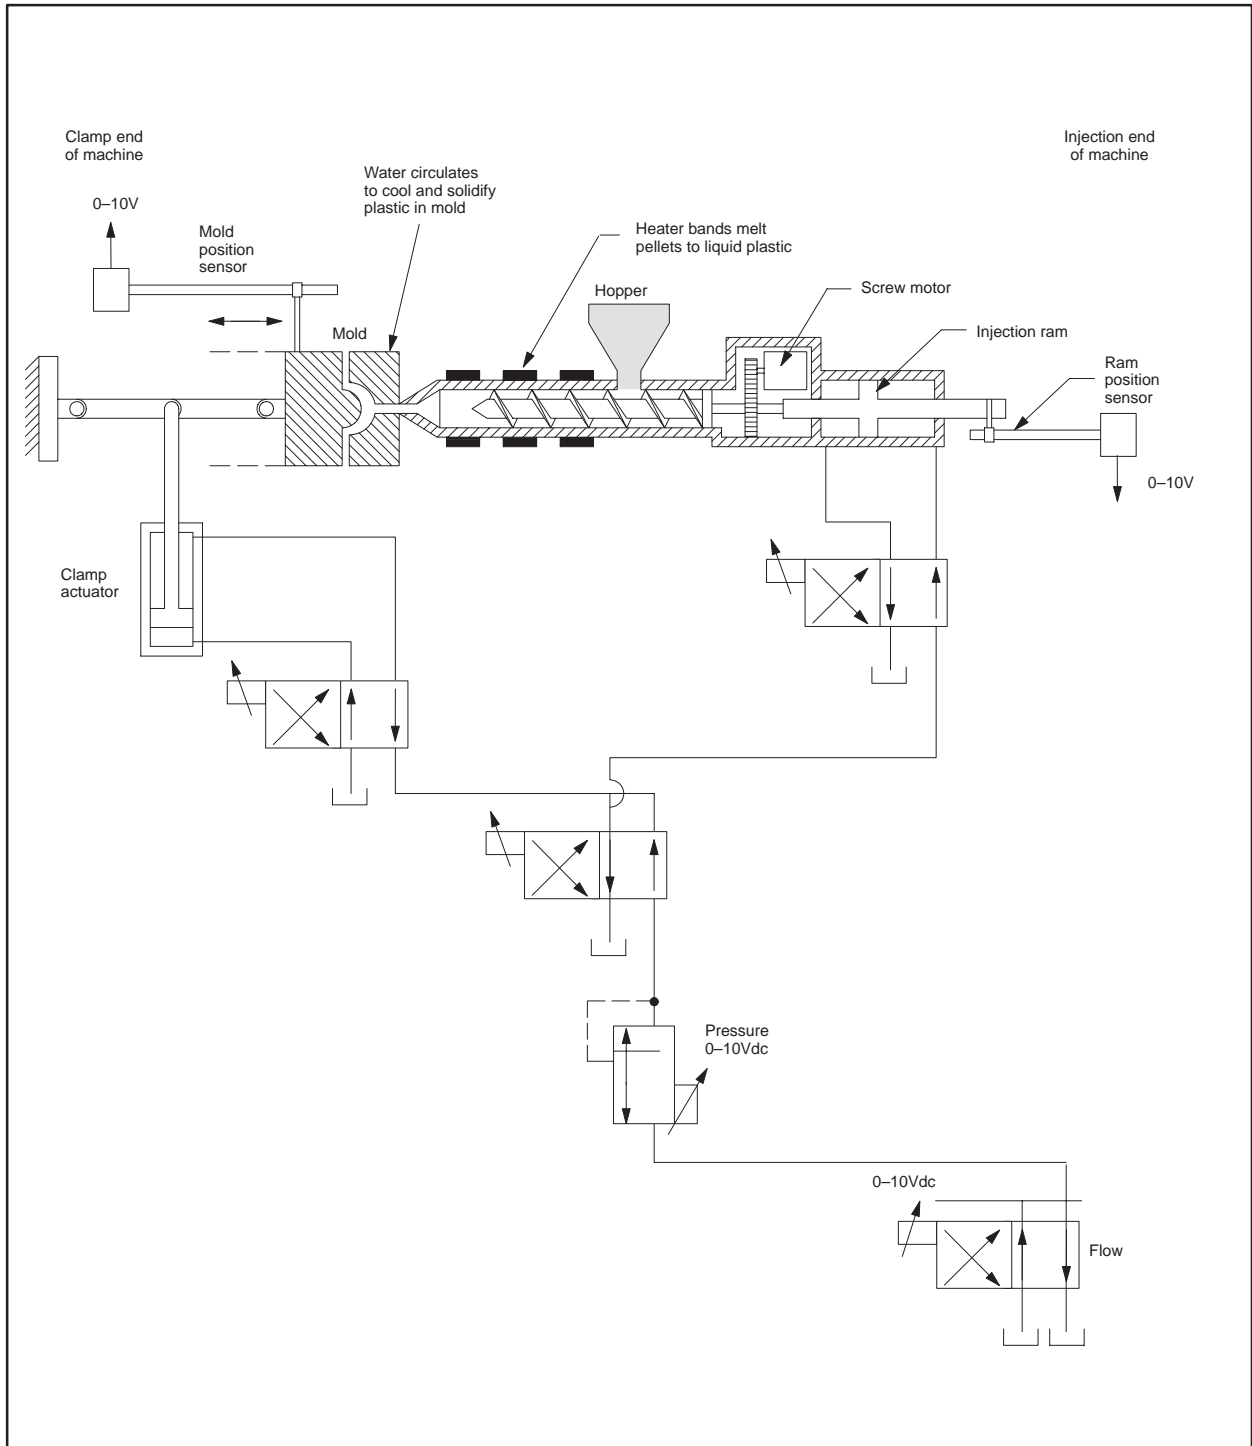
Plastic Injection Molding Machine Control Points, Machine Configuration 2
